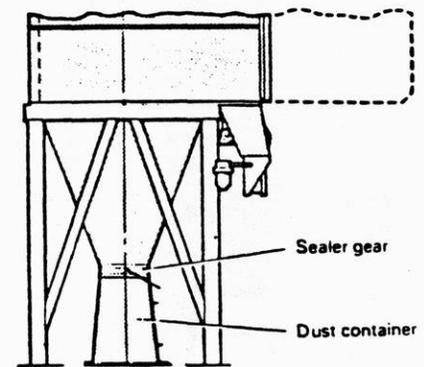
DCE 'UMA' type dust containers with quick-release sealer gear
